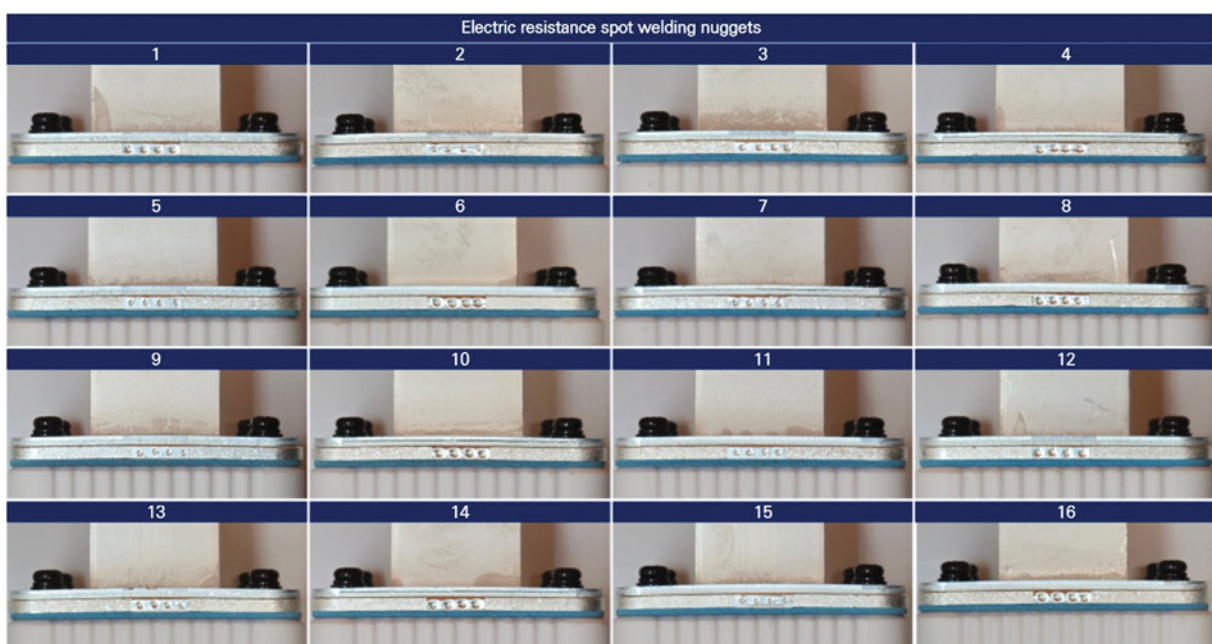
Experimental nugget images of DC FUSE elements electric resistance spot welding.
